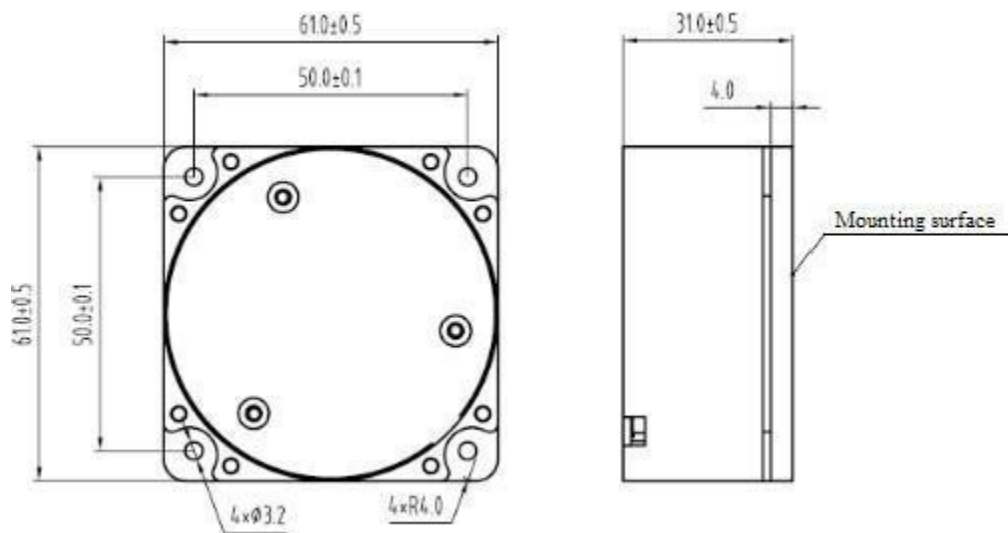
FOG-60 Outline Dimension and Mounting Dimension
